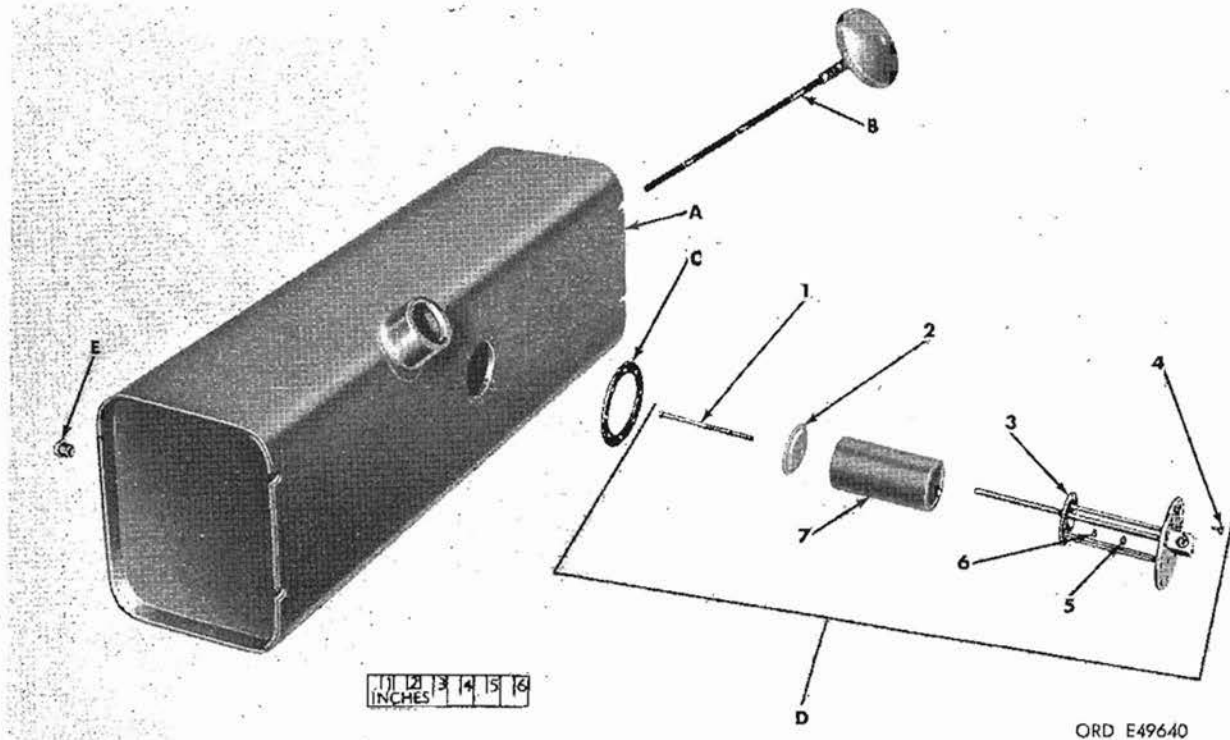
Fuel tank, fuel filter, and related parts — exploded view.
